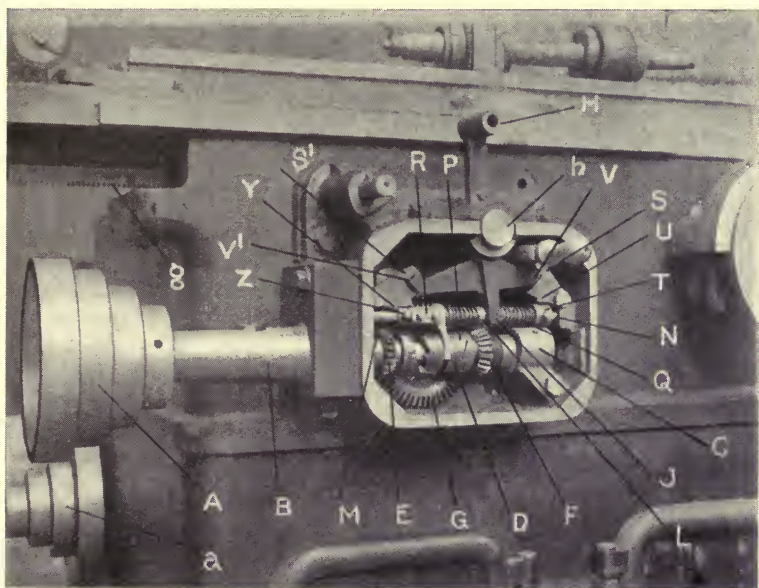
TRIGGER REVERSING MECHANISM—GUEST
